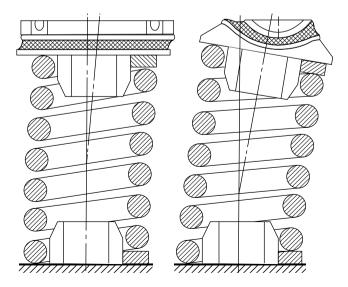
Spring resting on rubber-metal cylindrical joints.
